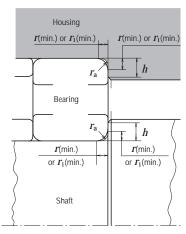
Chamfer Dimensions, Fillet Radius of Shaft and Housing, and Shoulder Height
